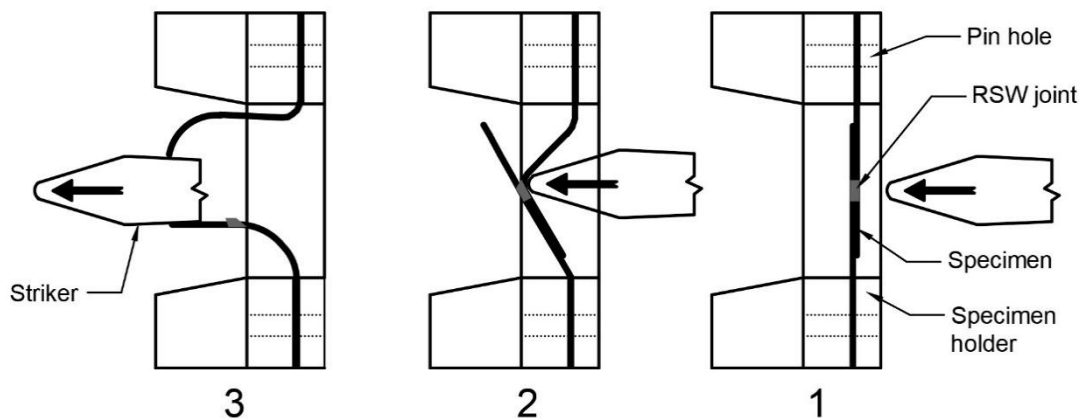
Schematic drawing of impact-bending test: (1) the specimen is fixed in the specimen holder, (2) the striker hits the specimen, (3) the striker goes through the specimen and causes weld plug and base material bending.
